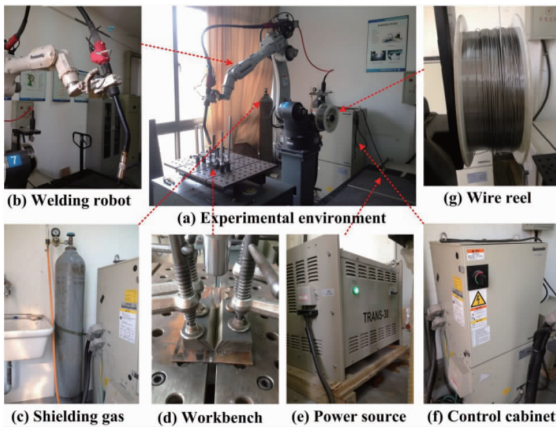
Welding systems employed for Invar alloy plate
